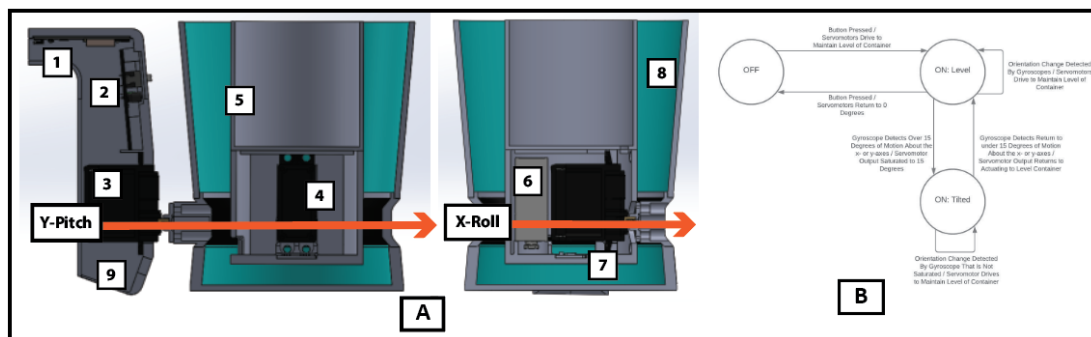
(A)(Cross sectional CAD view about the Y-Axis (left), Cross sectional CAD view about the X-Axis (right), 1:Adafruit Huzzah ESP32 Microcontroller, 2:Voltage breakout board, 3:Y-Pitch MG 996R Servo Motor, 4:X-Roll MG 996R Servo Motor, 5:Liquid Container, 6:9V Battery, 7:MPU6050 6-Axis Gyroscope, 8:Outer Cup Container, 9:User Handle) (B)(Finite State Machine Control Scheme)
